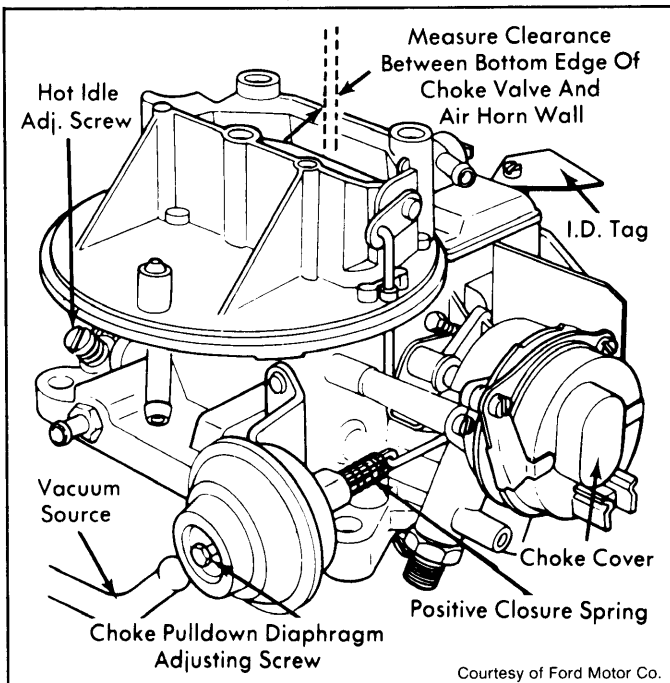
2150 Choke Pulldown Adjustment (Initial Choke Valve Clearance)
